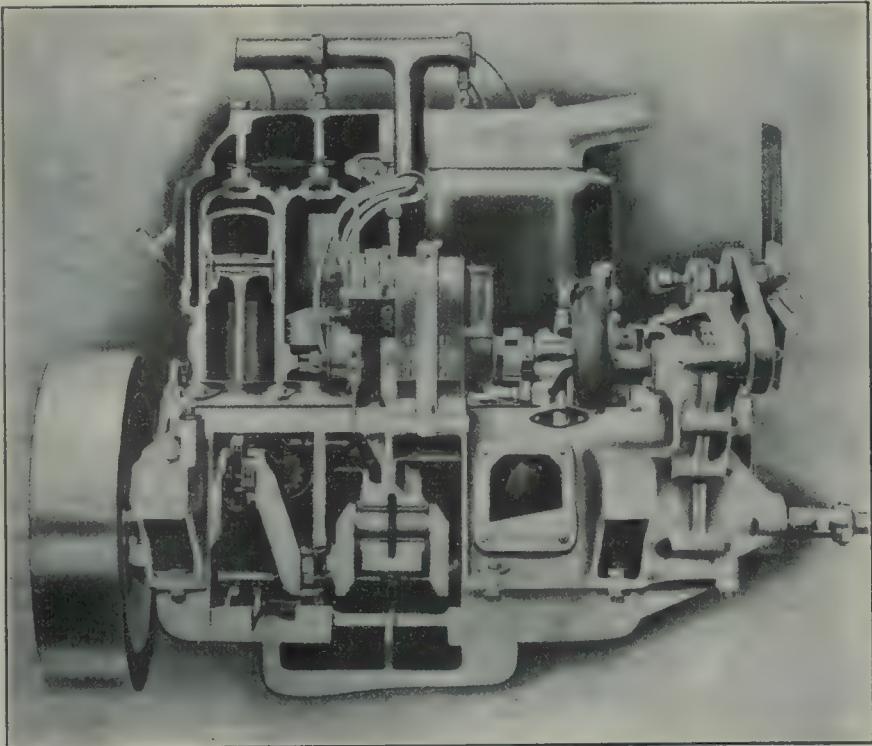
SECTION OF ENGINE SHOWING CYLINDERS MOUNTED ON CRANK CASE.
